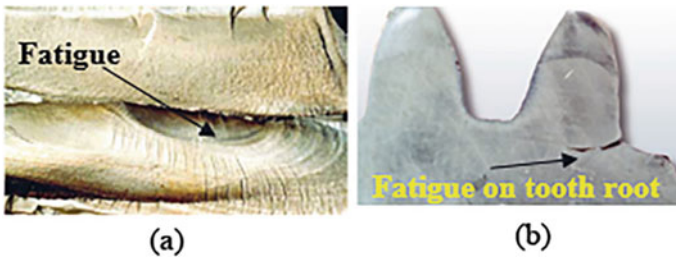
Fatigue on gear tooth: a surface, b root filler [2]
